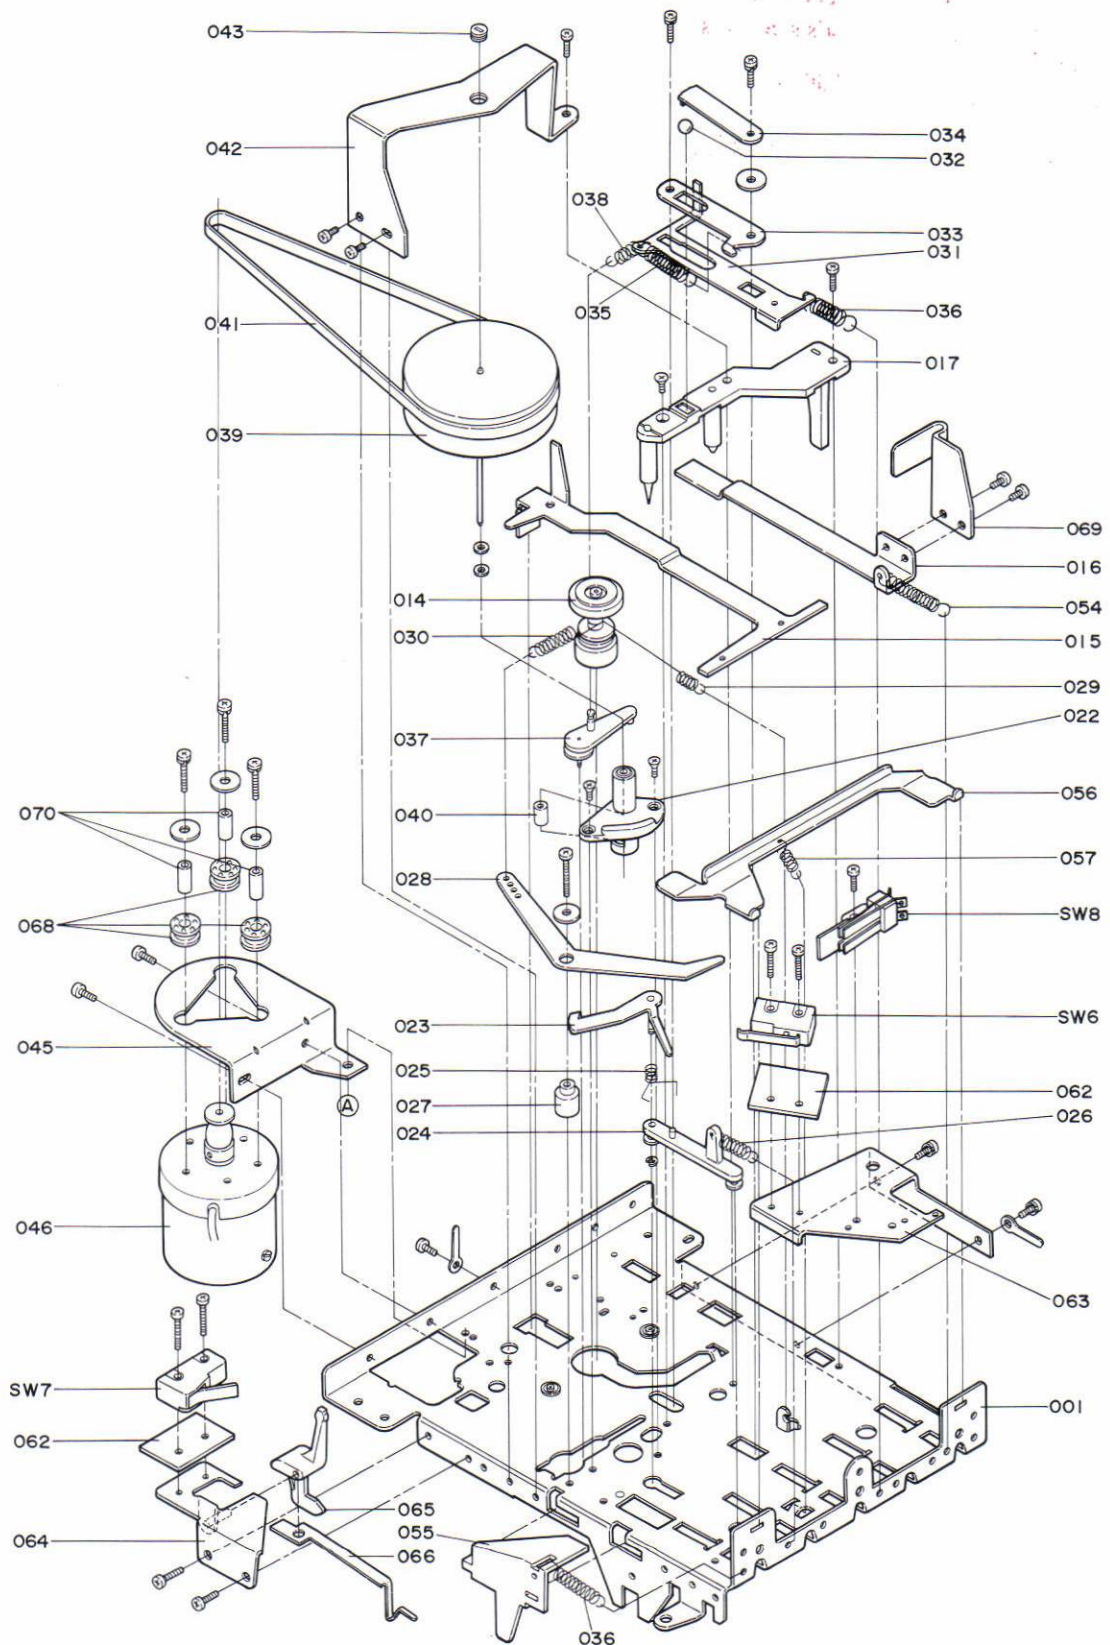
TAPE DECK MECHANISM EXPLODED BOTTOM VIEW (SG-309H ONLY)
